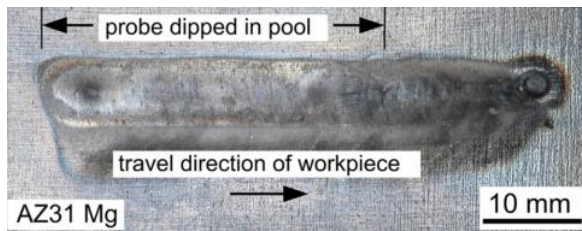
Weld bead of AZ31 Mg, showing grain refinement where ultrasonic probe is dipped into the weld pool and unrefined zone due to probe-torch offset [115]
